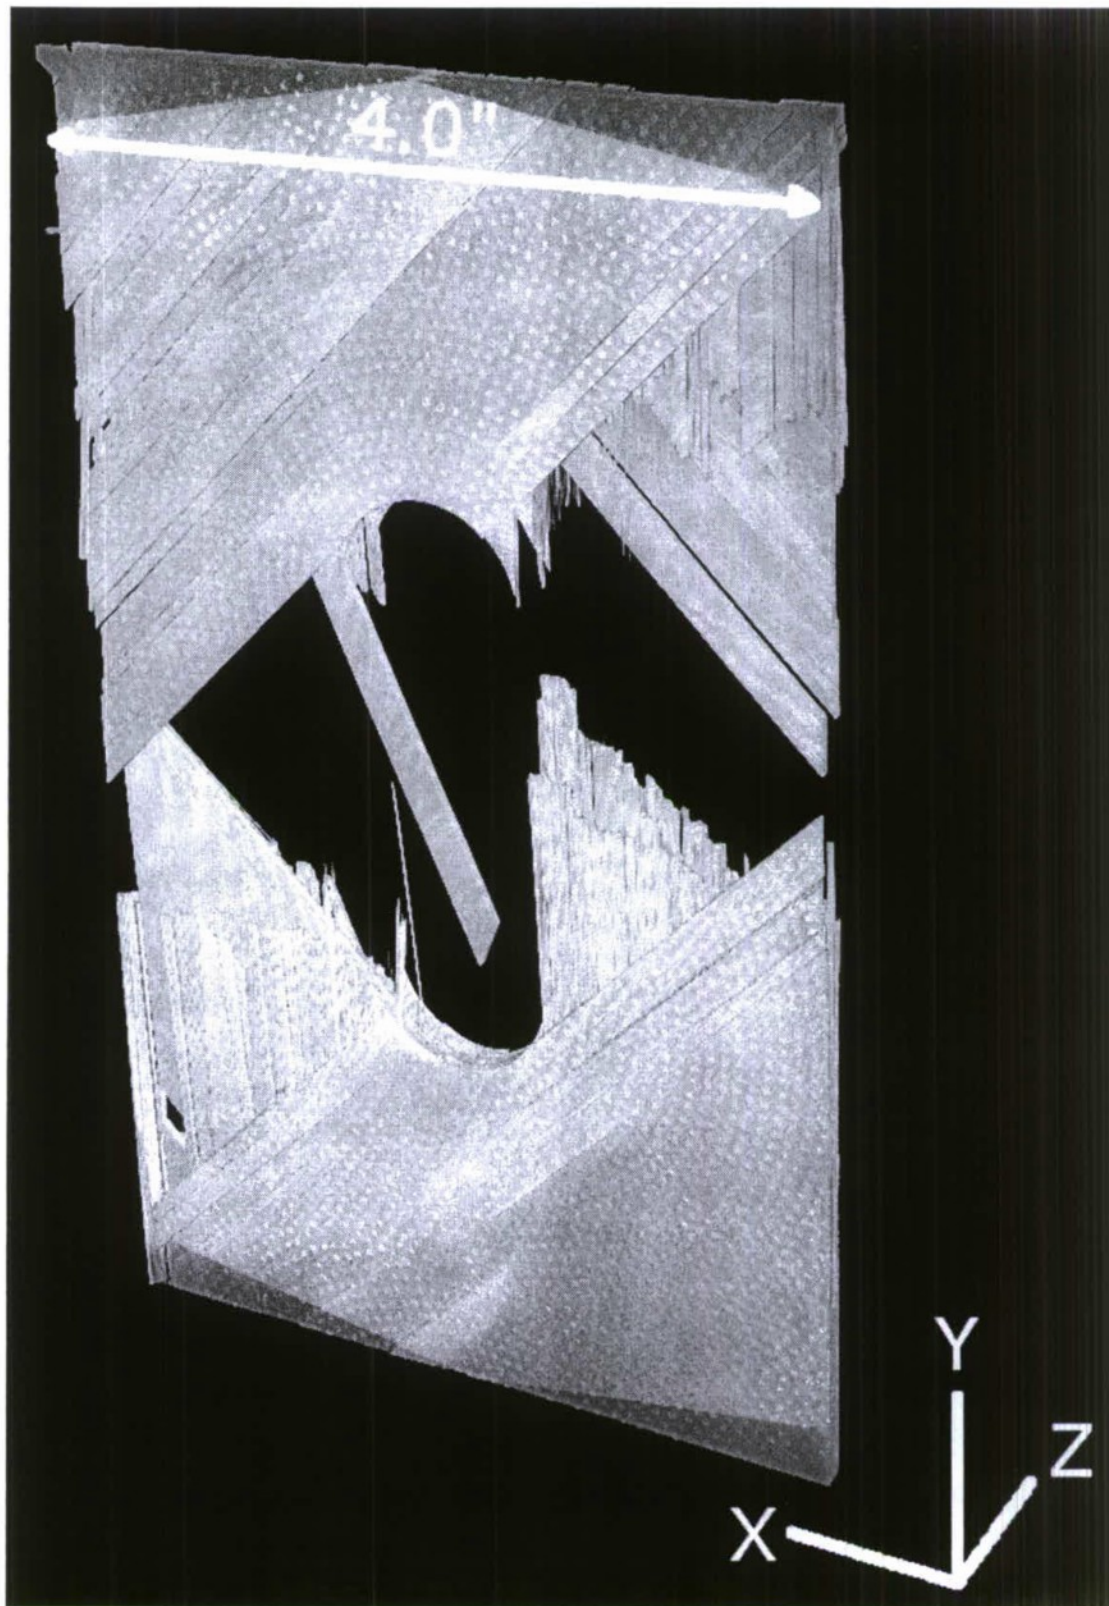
Three-dimensional view of the OHT specimen pieces from Figure 40 and Figure 41.
